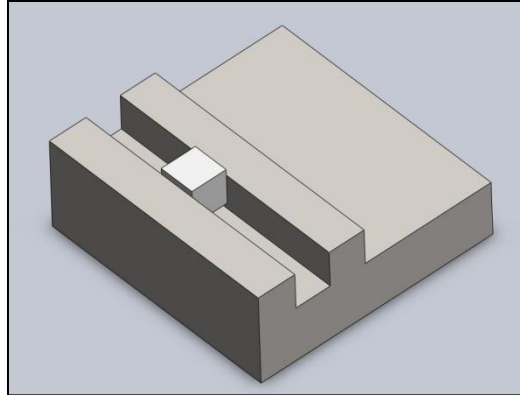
In the first step of the fabrication process, a 30x30x30 mm cube of base material would be secured in the mill vice.
